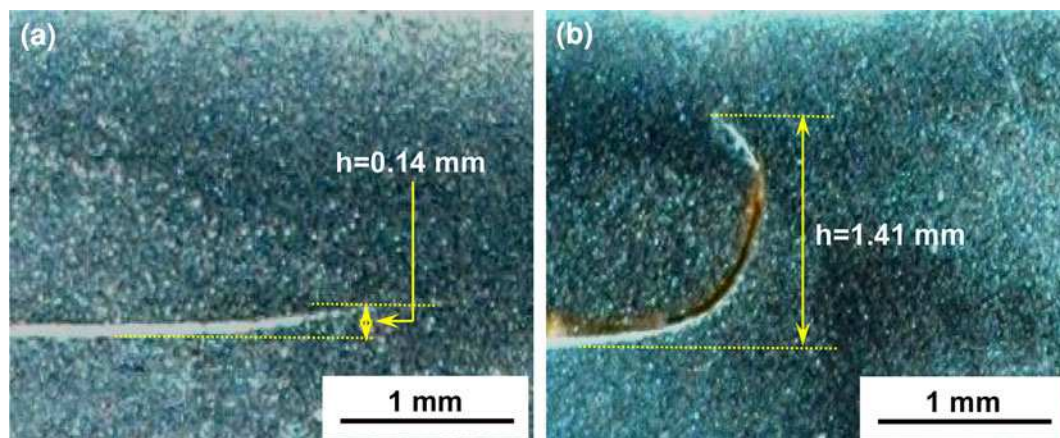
Hooking defects in the friction stir lap welds and their relative sizes on the AS for the welding conditions of (a) 1000 rpm at 20 mm/s and (b) 1500 rpm at 20 mm/s.
